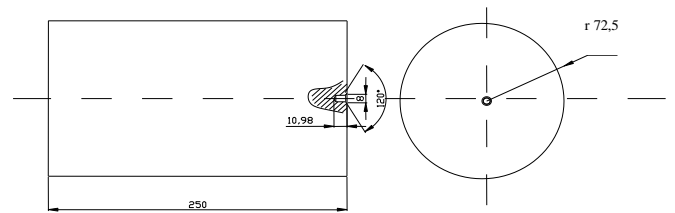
Aluminium Al-6061 AlMgSiCu test material
